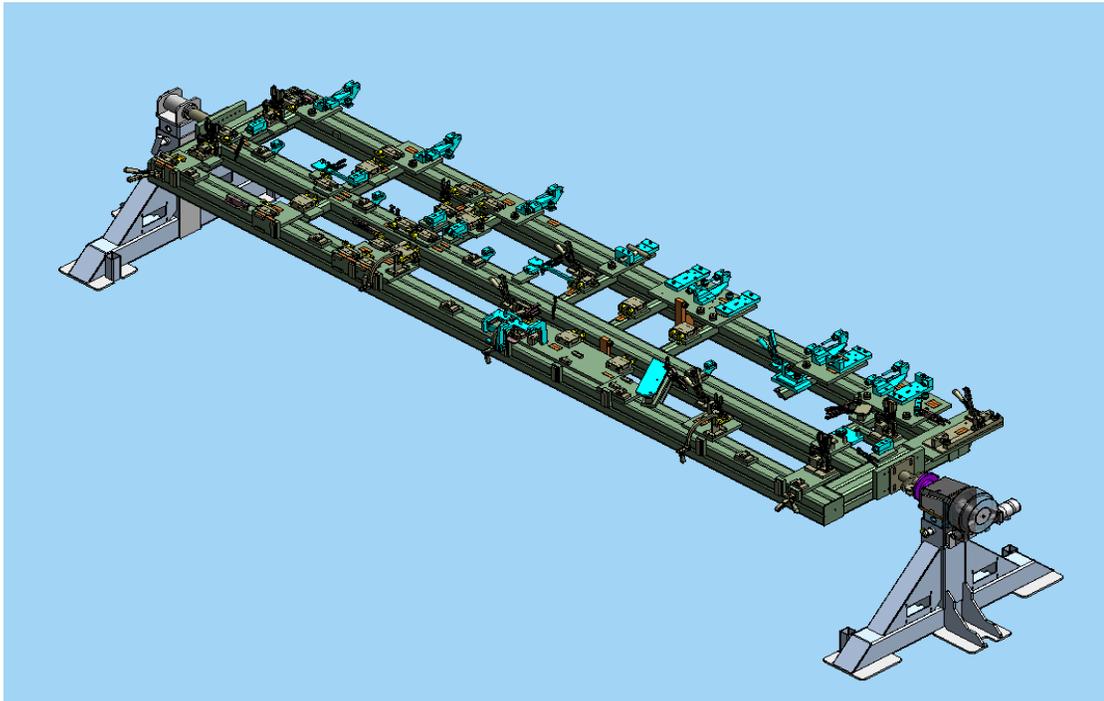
A Pair of Hydraulic Powered A-Stands Supporting a Welding Fixture
